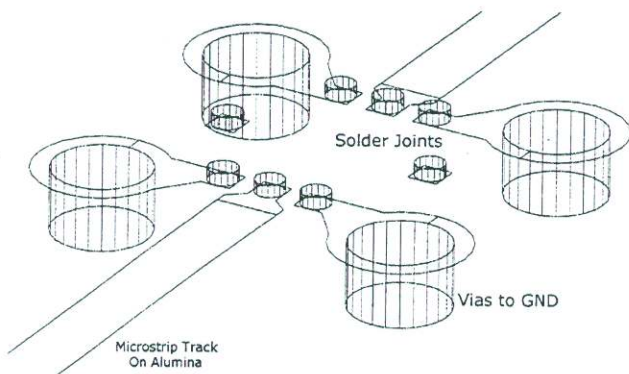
Alumina Carrier Model with Pre-Positioned Solder Bonds
